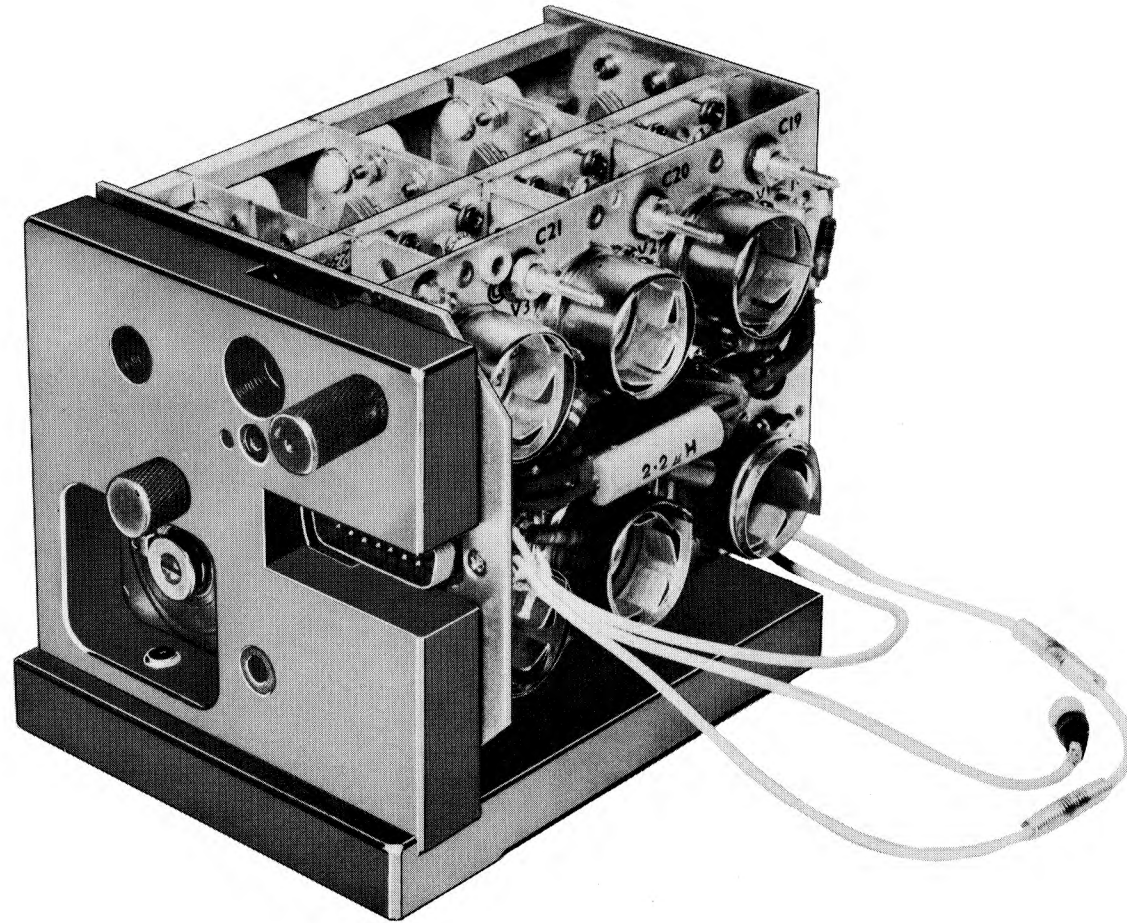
Checking fixture, Ref.No.IOAG/937, with amplifier unit in position
